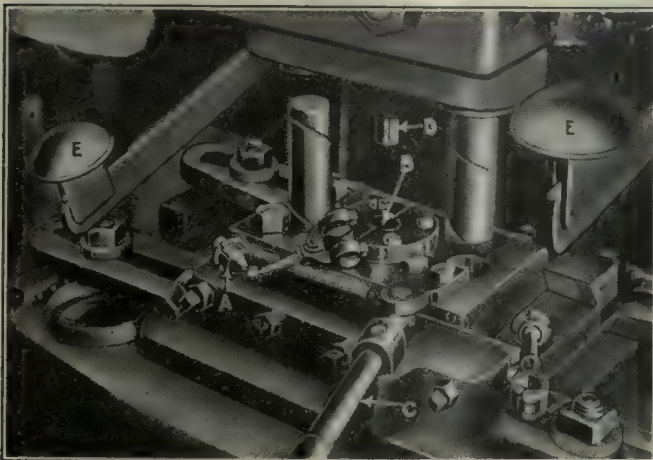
FORMING A BALL-AND-SOCKET JOINT
